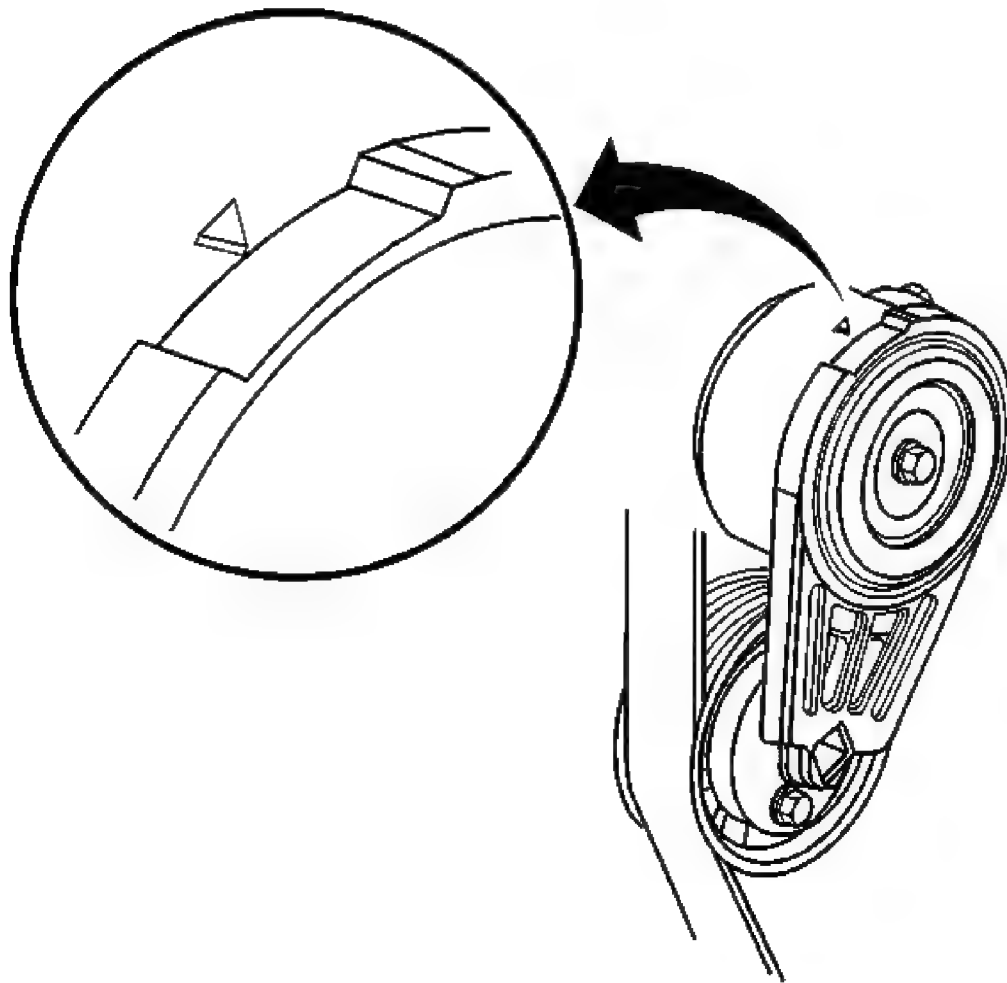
Locating Fix Pointer & Index Marks On Drive Belt Tensioner
